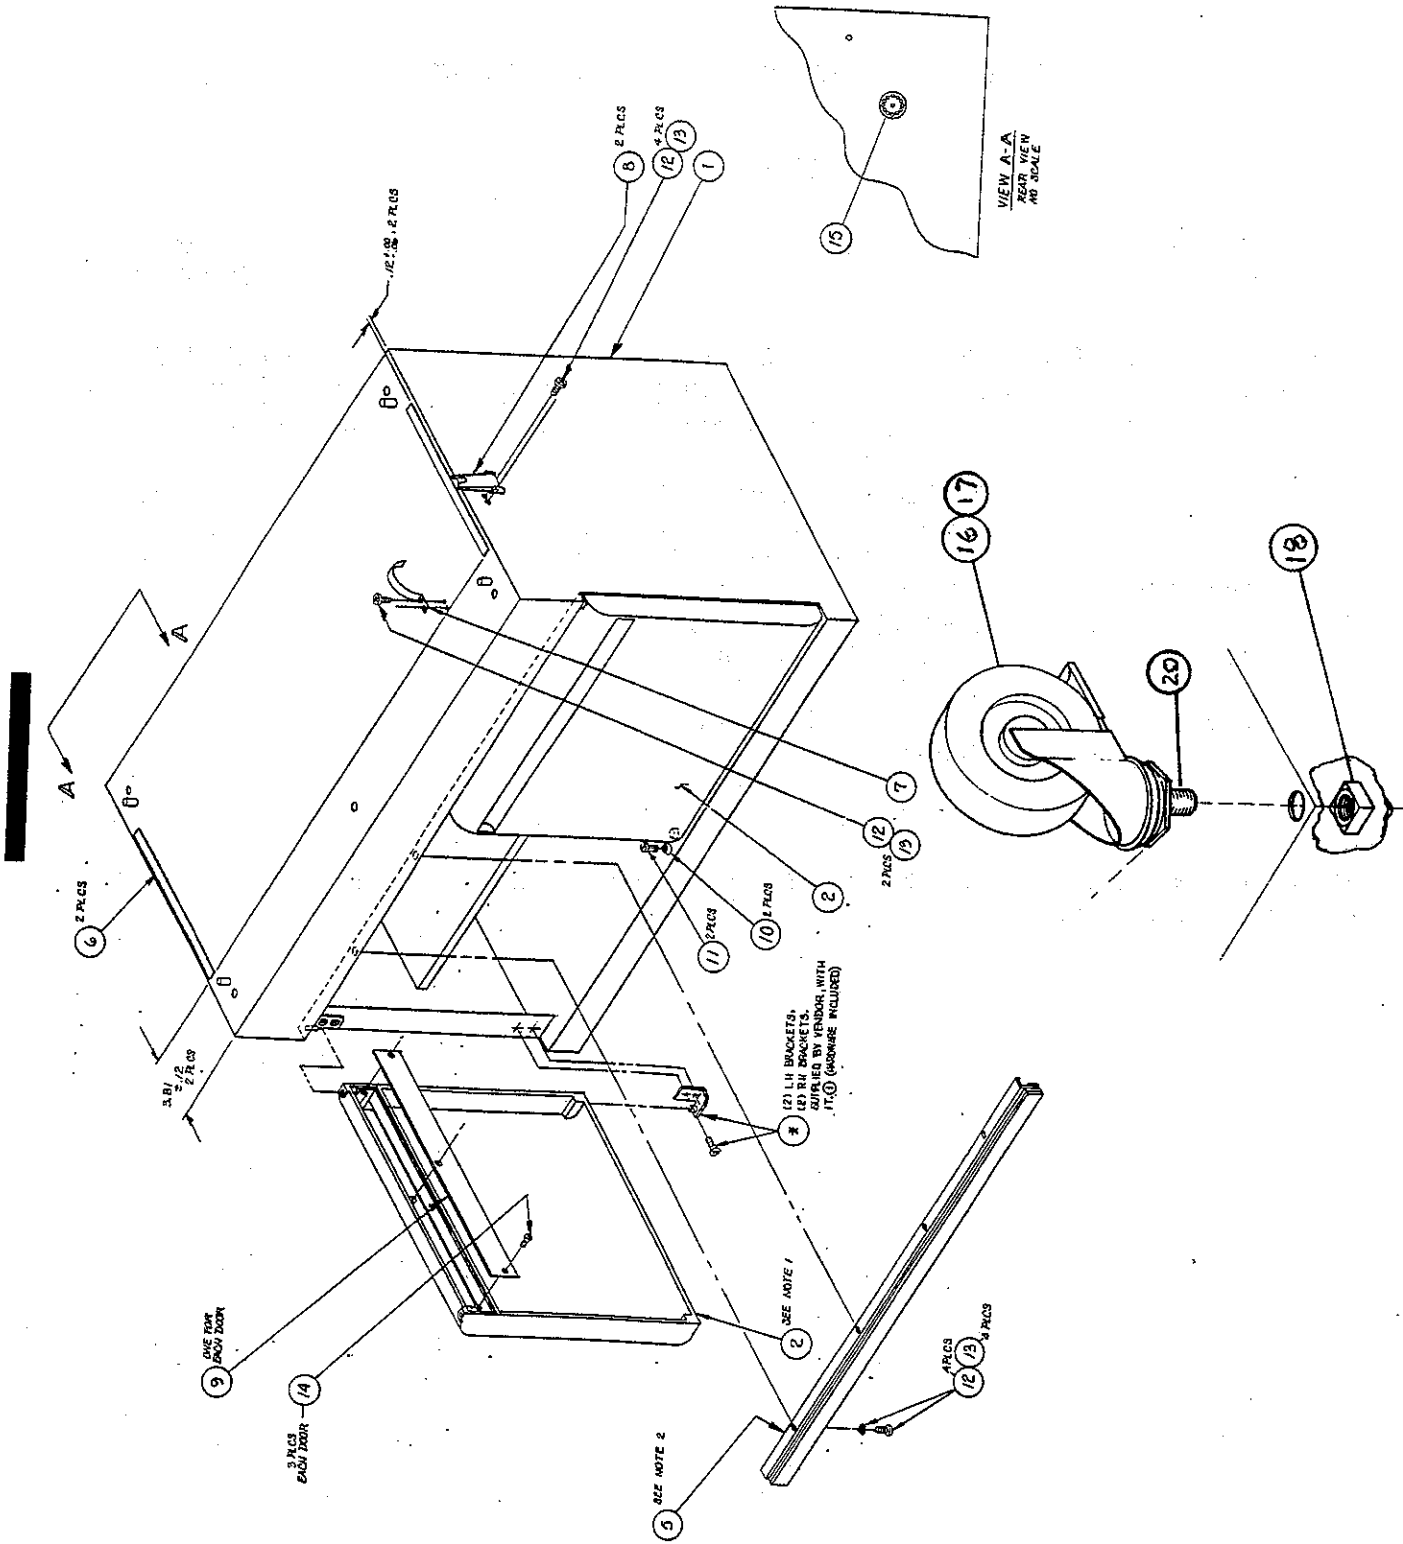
PARTS LOCATION DIAGRAM, CABINET STAND ASSEMBLY
